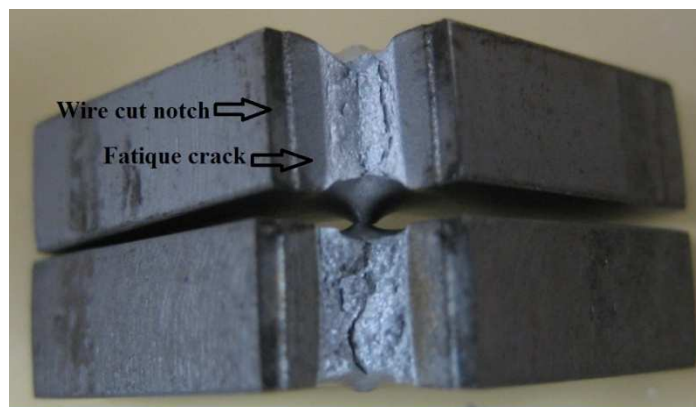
Fracture surface of as-received (bottom) and hydrogen charged (top) samples.
